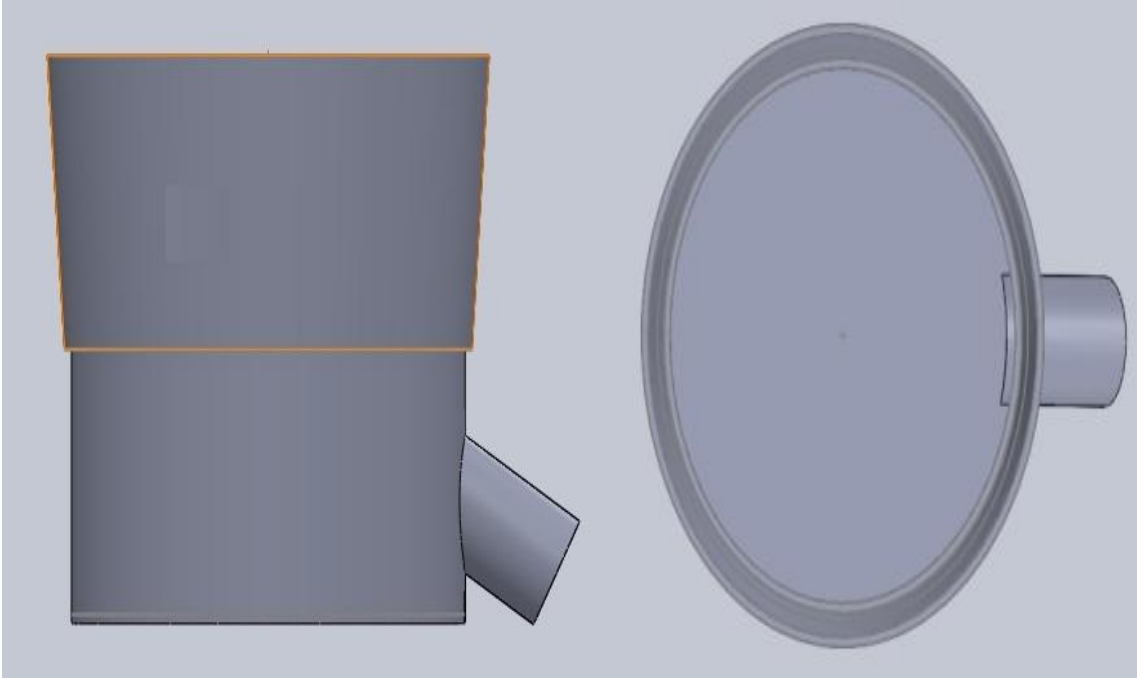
AIR INLET PIPE AT 30 ° TO THE HORIZONTAL AXIS
